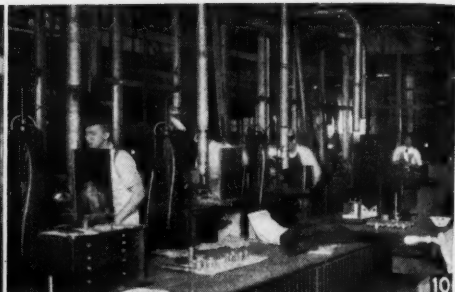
The King boring mill is used for boring the large holes. The piece shown in process is a pulley for an experimental machine. Fig. 10—A line of surface grinders. Note the glass partition which separates the grinders from the rest of the shop. Fig. 11—Grinding a boring bar for use in an automobile manufacturing plant.
